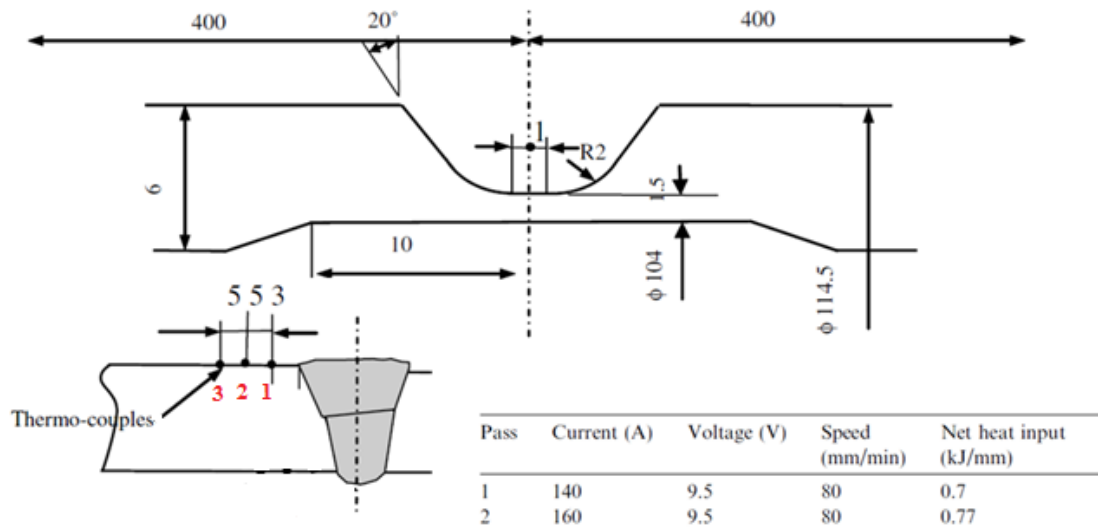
Deng and Murakawa experiment, dimensions in mm (Deng and Murakawa, 2006)
